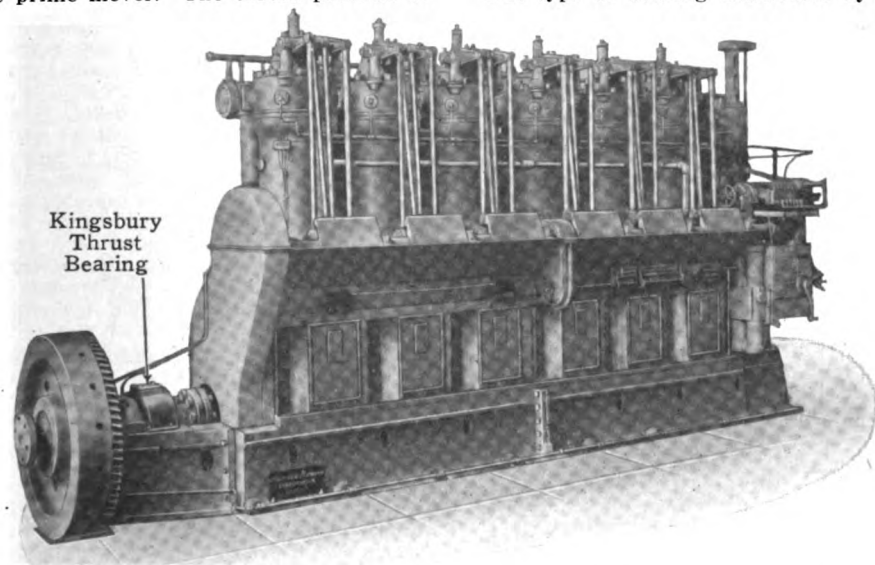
McIntosh & Seymour reversible Diesel-engine with thrust-bearing between the engine and flywheel
